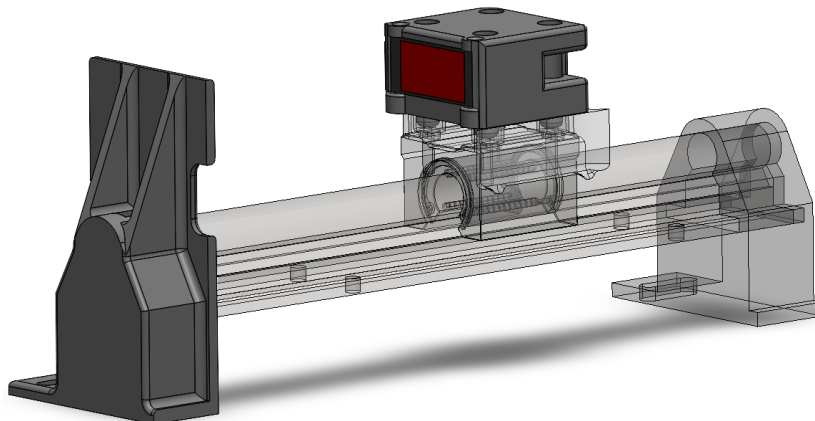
Laser mounted on the hydrostat carrier, projecting onto a board.
